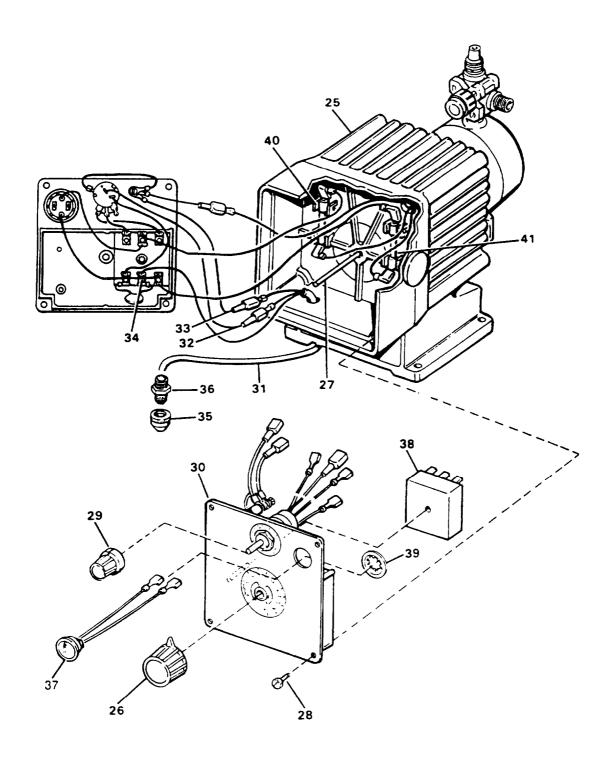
Chemical Injection Pumps (sheet 2 of 2)
